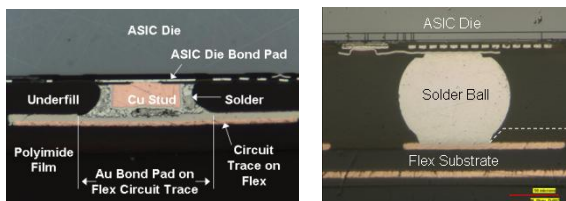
Optical photograph of cross section showing (Left) micro pillar-bumped ASIC die with eutectic solder on single-sided flex substrate, and (Right) solder-bumped (SAC) ASIC die on double sided flex substrate.
